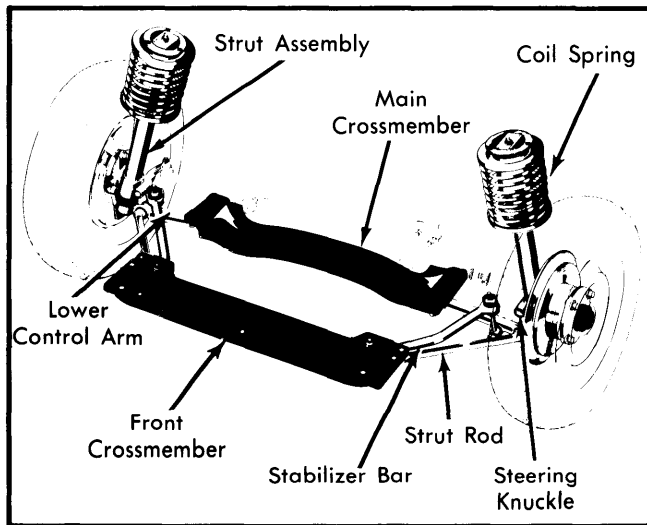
Sectional View of Peugeot Front Suspension Assembly
